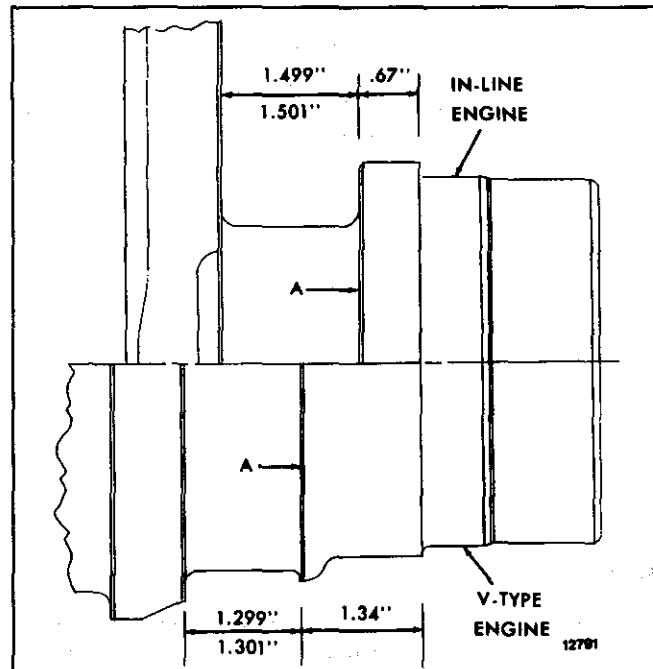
Standard Dimensions at Crankshaft Thrust Surfaces - In-Line and V-Type Engines
